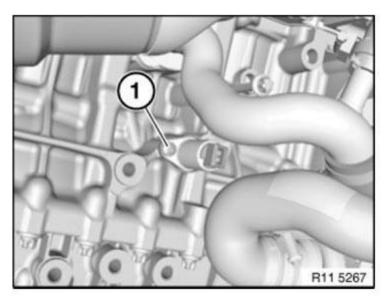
Identifying Hydraulic Valve Mounting Screw Courtesy of BMW OF NORTH AMERICA, INC.
